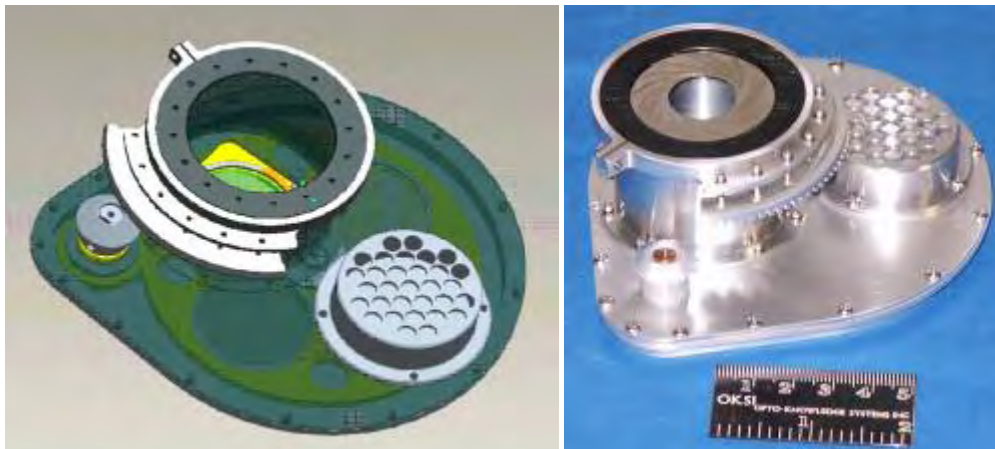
3D CAD model of the cold assembly showing the radiation shield, the cold filter wheel, cold stop, and getter (left), and the as-built parts (right).
